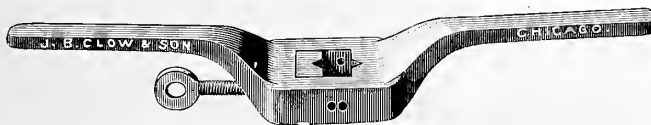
EXTENSION WRENCH, FOR SCREWING TAPS IN CAST-IRON PIPE.
